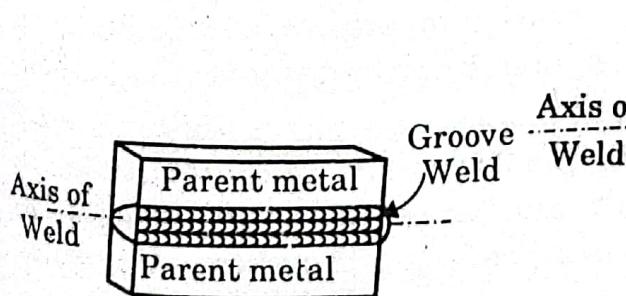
Horizontal welding position—groove weld.
